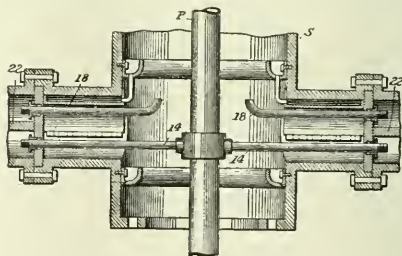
CONNECTION BETWEEN SHAFT AND RABBLE-ARM.
